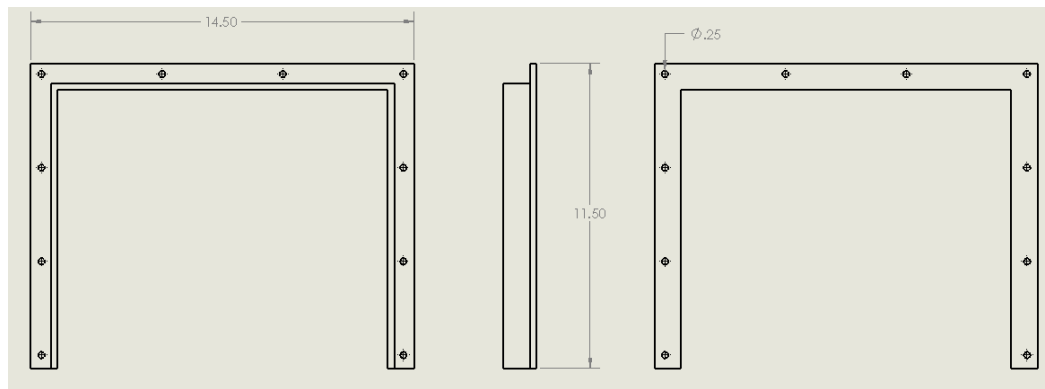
Orthographic projection views of the Blower/ Louvre and Contraction side flanges marked with basic dimensions.
